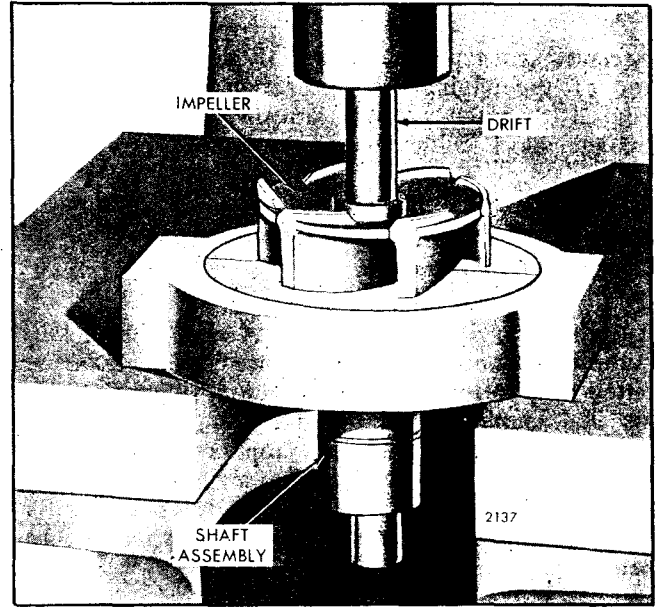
Removing Shaft from Impeller with Tools J 8329 and J 358-1
